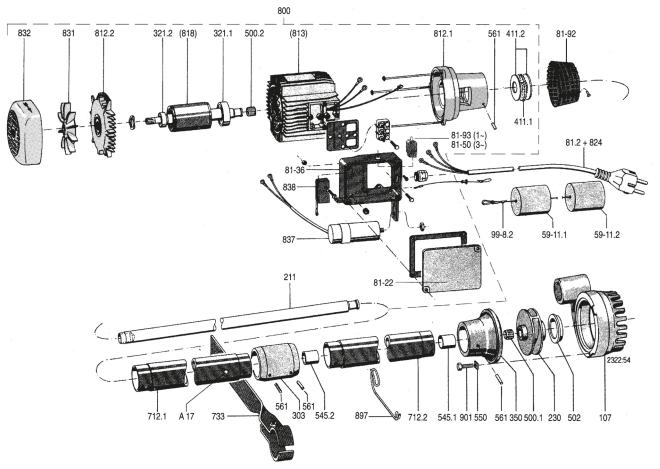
Exploded view - Rotex 10, 20 () = Not available as a separate spare part
